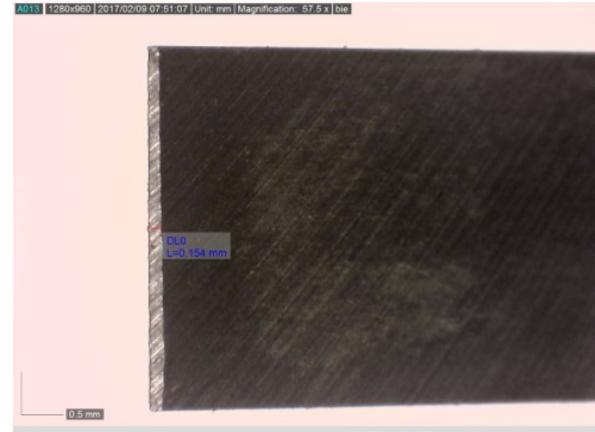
Cutting edge (left side) made of a hard-metal material DH10 with a bevel width of 0.15 mm. View towards rake face
